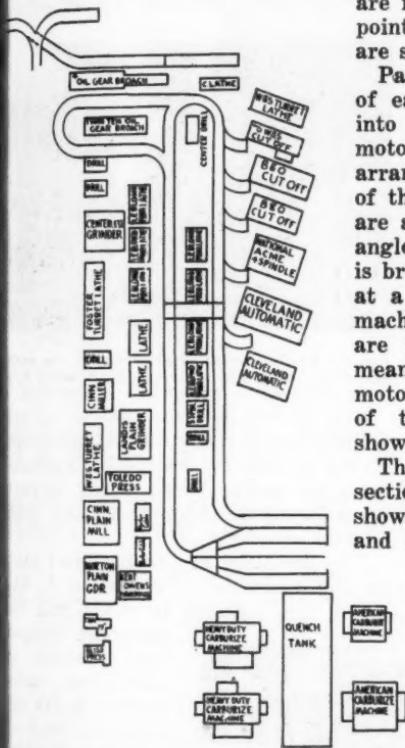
This drawing and the one on the opposite page comprise the layout of the gear department and track department, showing arrangement of production machines and conveyor lines.
